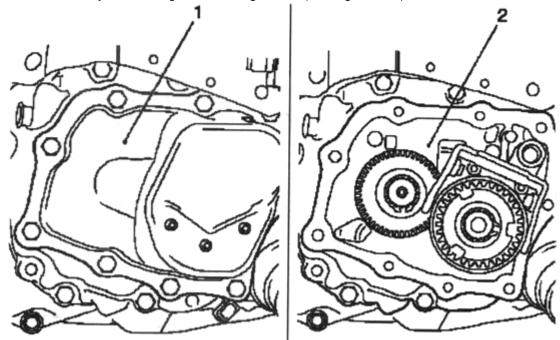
Removing the back cover of gearbox: 1,2 - cover
